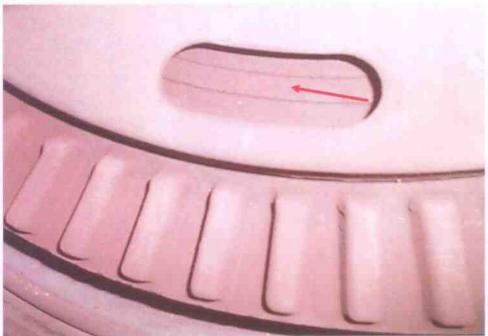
shows the brake shoes (brake pads) location at the rear left wheel of the Prime Mover. The brake shoes (brake pads) of the Prime Mover were all found to be in serviceable condition with sufficient frictional material for operational purposes.
